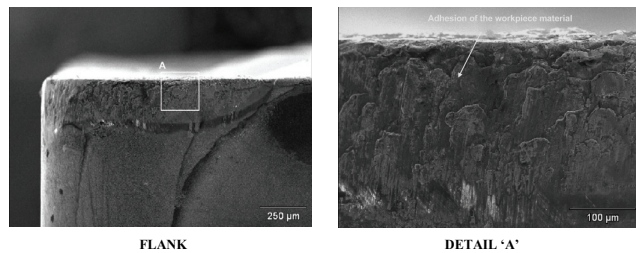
Flank wear land of the cutting edge used to cut L3 alloy at the end of tool life $v_c = 160$ m/min.
